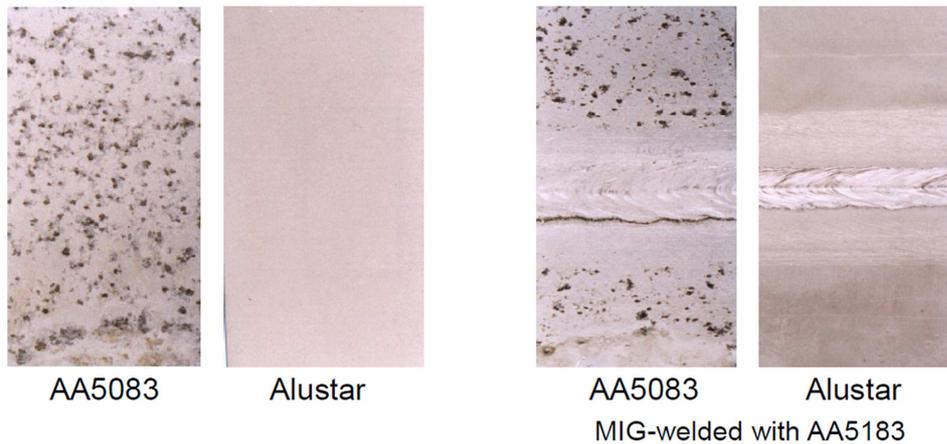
ASSET Corrosion Test Results before and after Welding [25]
